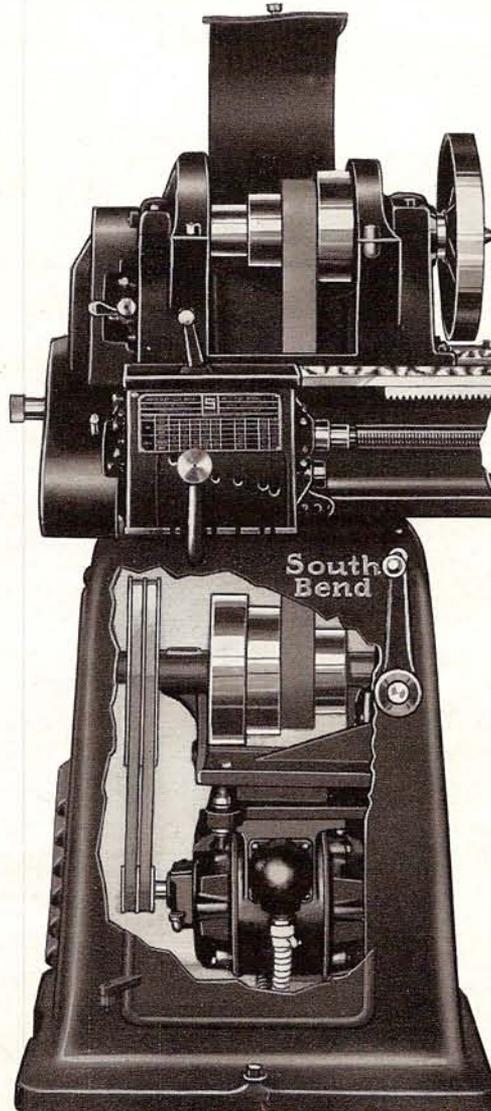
Front View of Lathe with Door Cut away, showing arrangement of Motor and Drive Mechanism.
